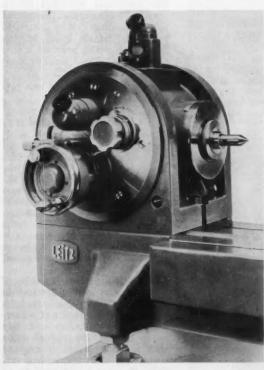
Optical dividing head to be exhibited by George Scherr Optical Tools, Inc.
